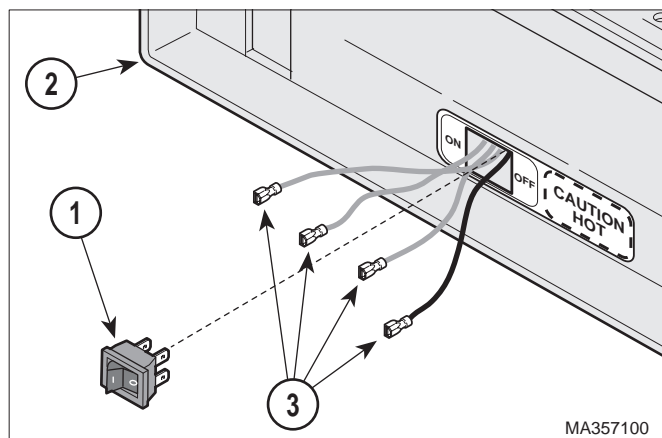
Heater ON / OFF Switch Removal / Installation
